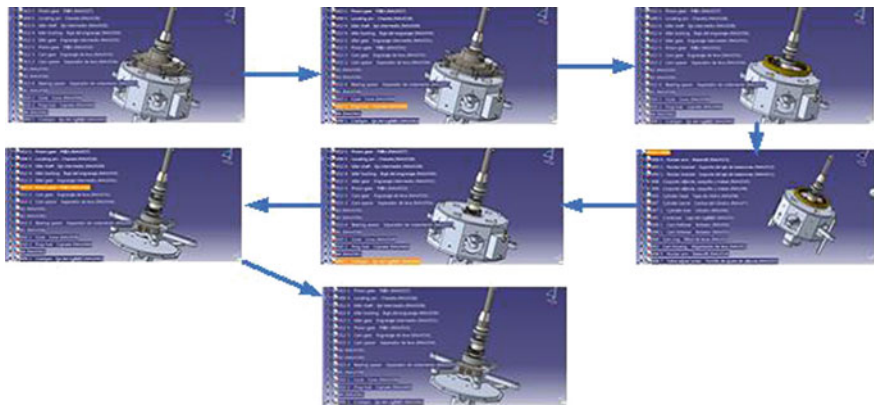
Third-level component disassembly, its disassembly order is: disconnect shrouded peopeller *a*—disconnect bearing *b*—disconnect auxiliary plate *e*—disconnect epicyclic gear *d*—disconnect orbital gear *f*—disconnect rotor can *i*—disconnect center axis and its accessories *c*, then we can get blank *g
